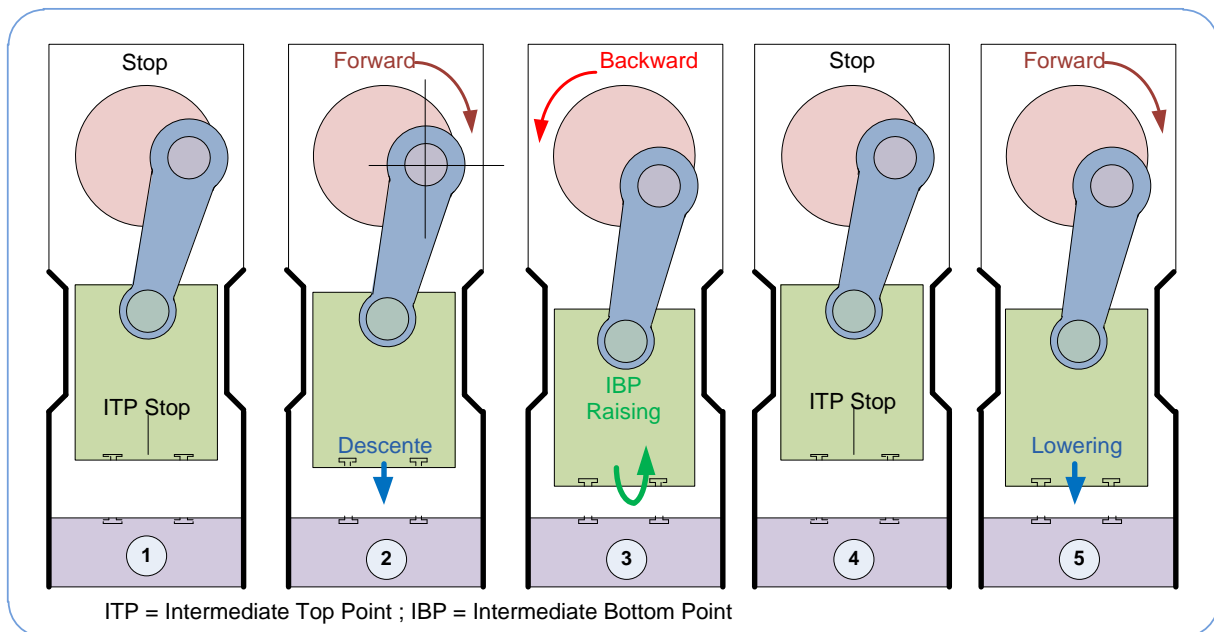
Mechanical press (eccentric drive) with servomotor - Stroke reduced by the servomotor (intermediate top and bottom points)
